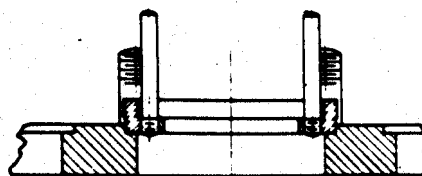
Lapping Tool for Valve Cover Gasket Surfaces.
